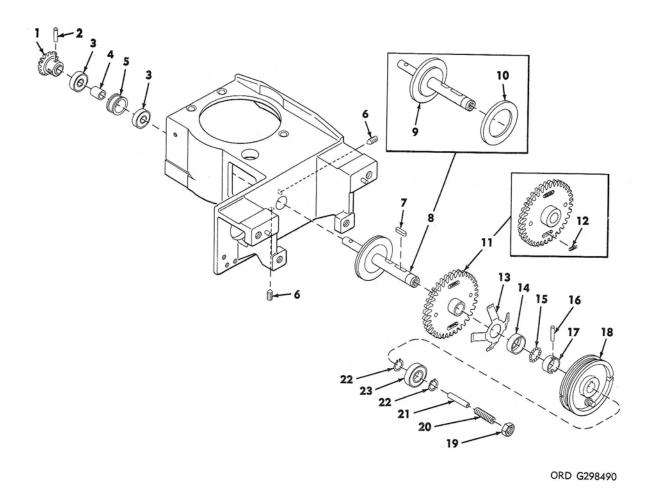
CARRIAGE, PEN /8171890/-PARTIAL FXPLODED VIEW
